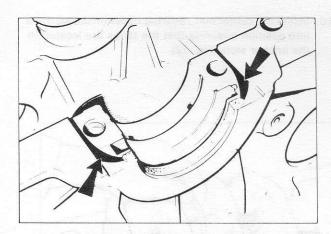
Crankshaft Rear Main Bearing Housing (Apply Sealer in Areas Shown)
